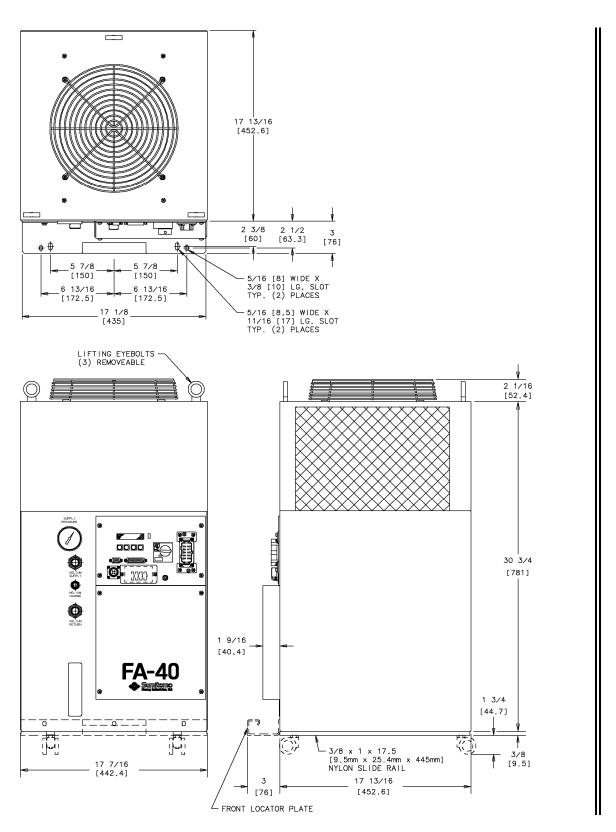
FA-40H and FA-40L Compressors, Dimensions
